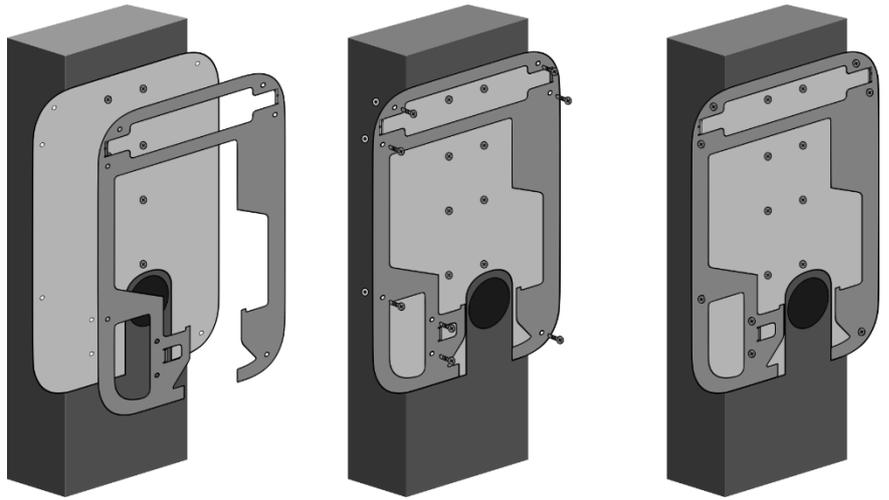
Possible mounting of the mounting bracket to the adapter plate
